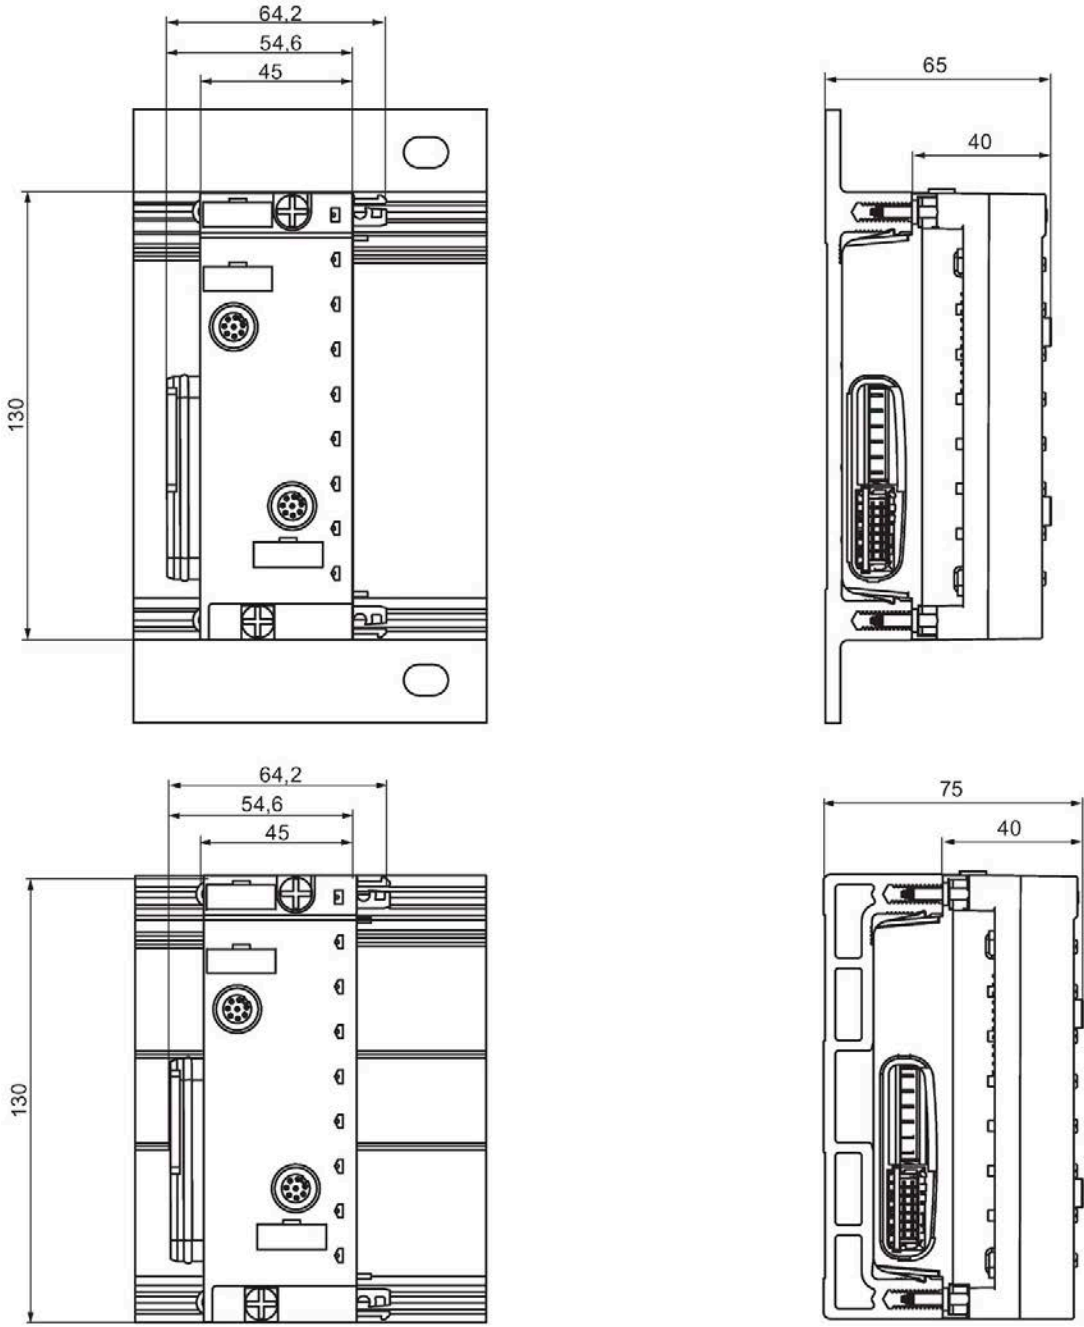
Dimension drawing of electronic module with CM IO 2xM12 connection module
